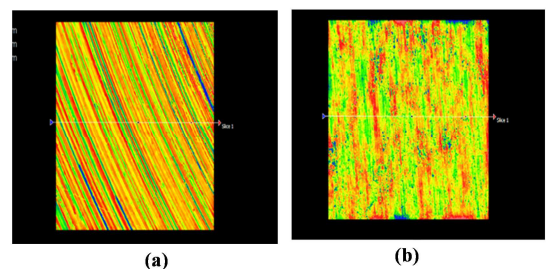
3D Contour of the Workpiece Surface for the First Experiment a) Before Polishing and b) After 20 min. Polishing.
